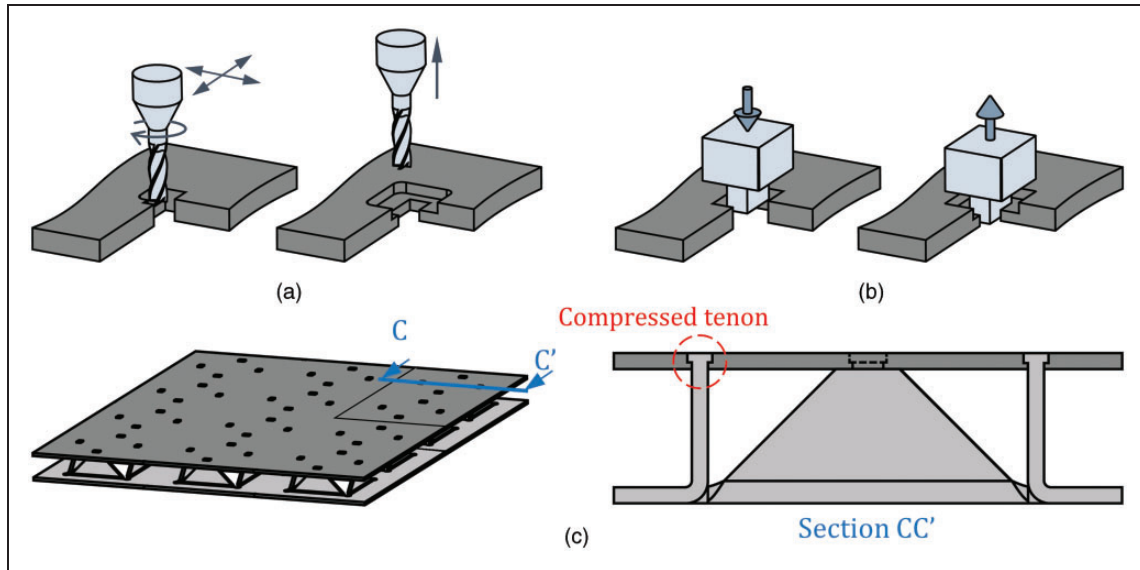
Counterbore mortises with rectangular stepped holes produced by combination of punching and (a) machining or (b) forging. The detail (c) shows a cross-section with a mechanical interlocking between the tenon and the mortise.
